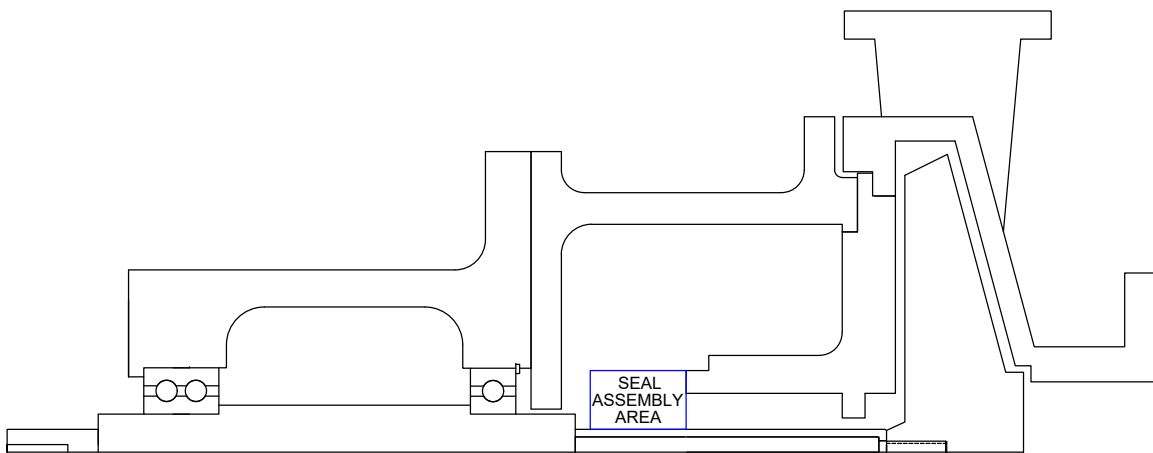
Fully assembled pump without seal. Assembly area highlighted.
